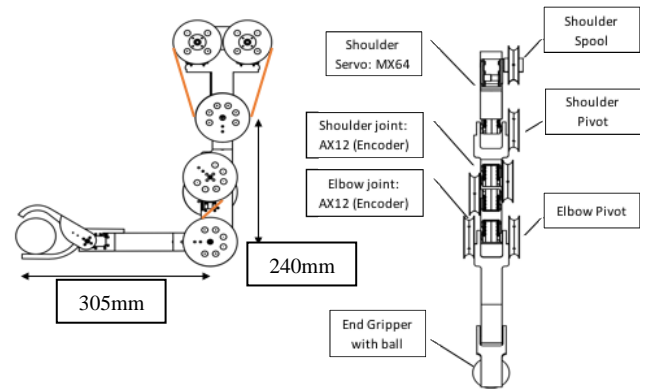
Geometric drawing of the robot arm. (Front and Side)
